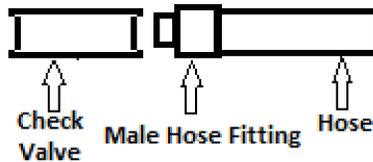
Drawing shows How the Check Valve is Connected to the Hose
